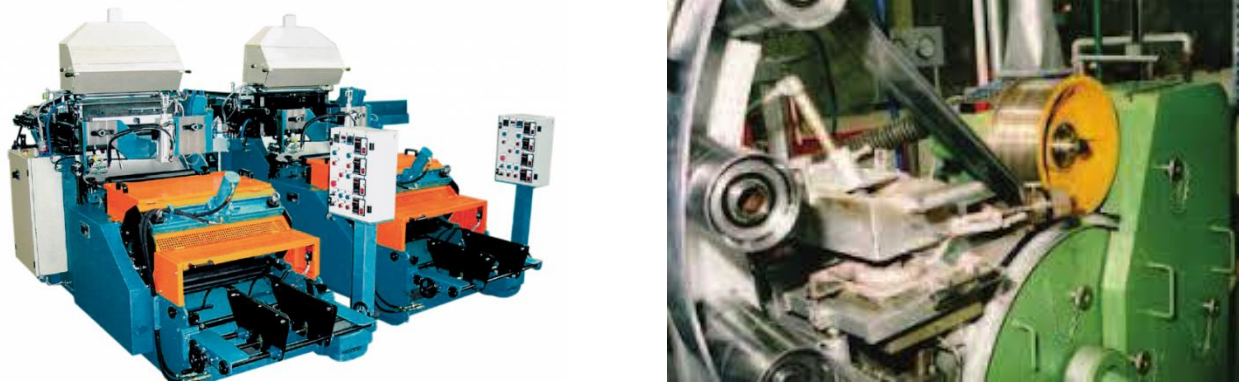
Representative Images of the Grid Casting (Left) [29] & Grid Stamping (Right) Processes
